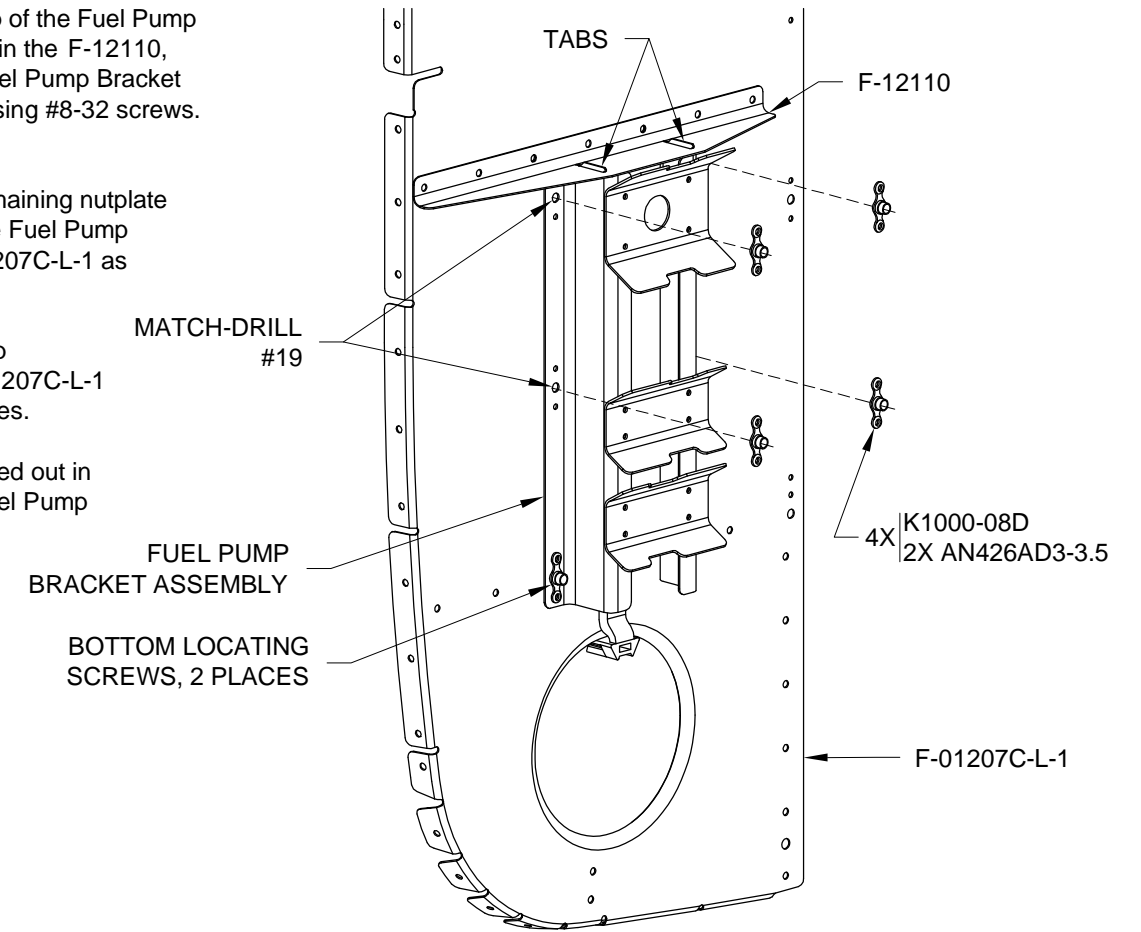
MATCH-DRILLING THE F-01207C-L-1
